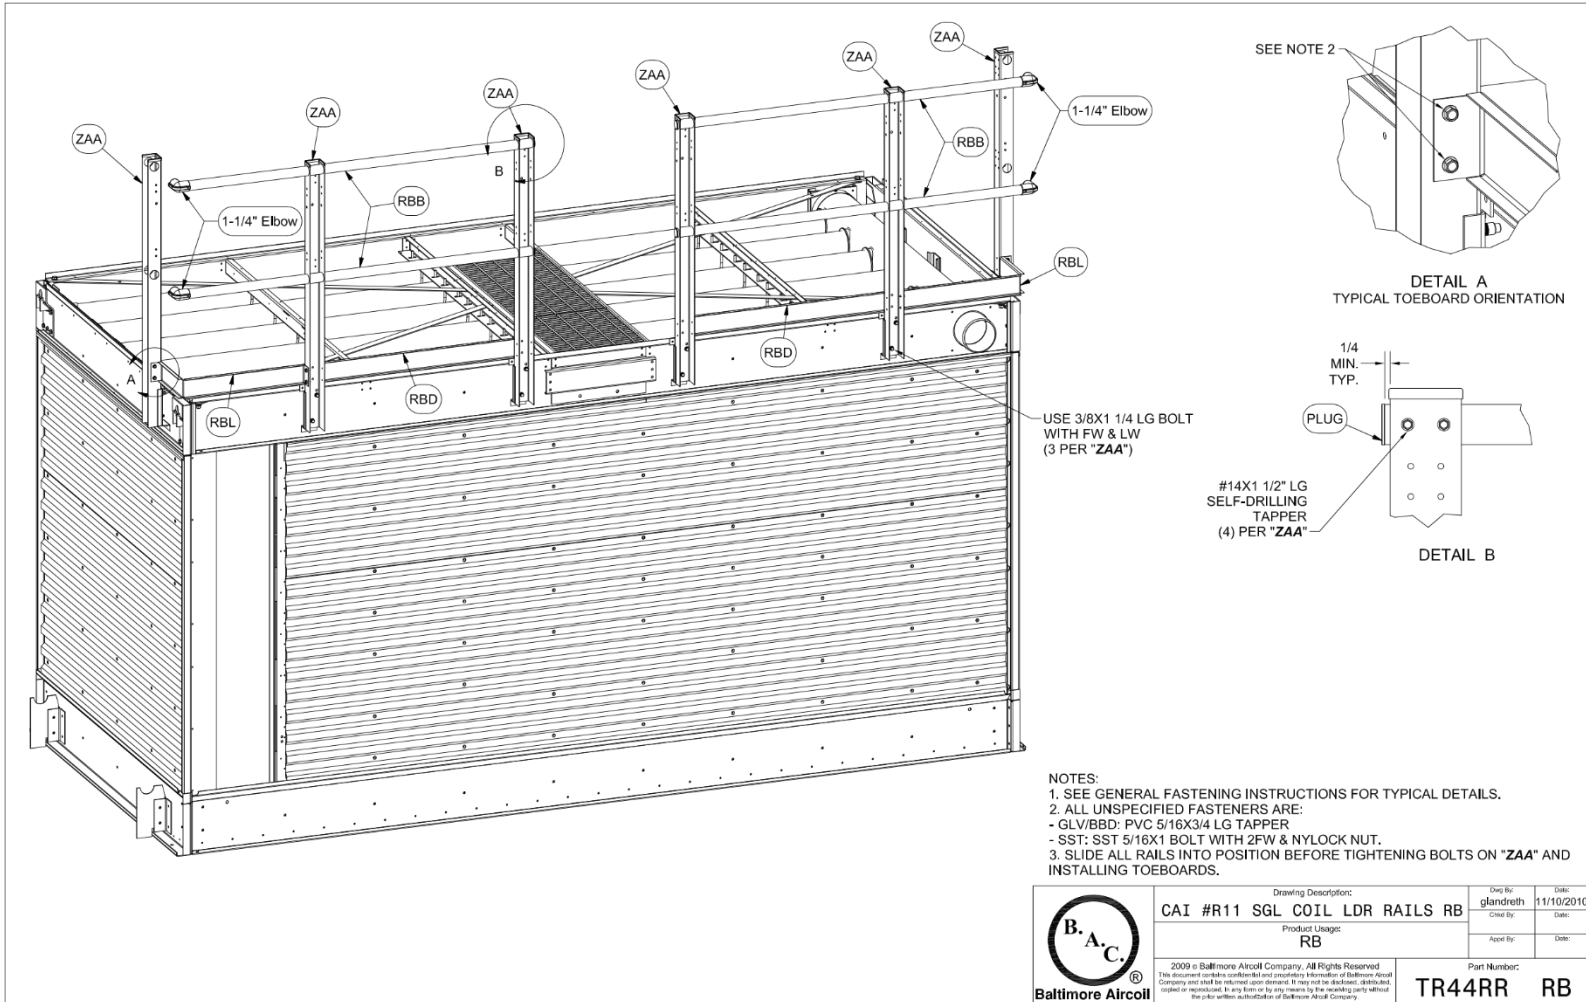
TR44RR Louver Face Railing Installation on Single Cell Unit, with Ladder Opening
